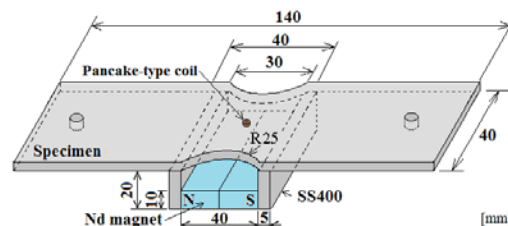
Dimensions of a specimen and arrangement of the pancake-type coil with Nd magnets.
